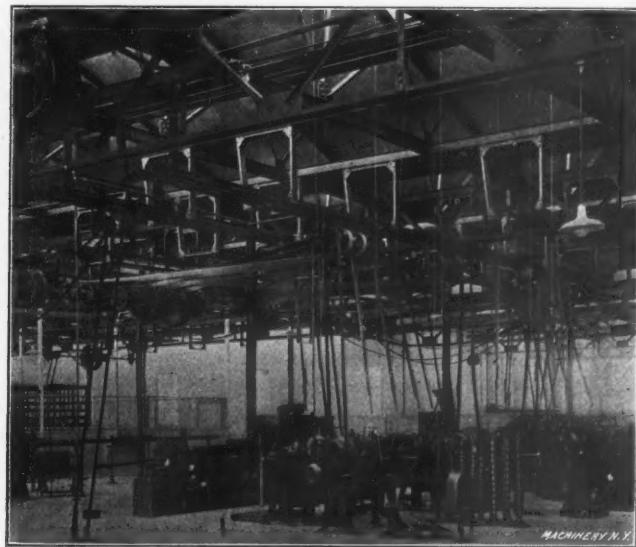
Turret Lathe Department, showing Motor Group Drive
